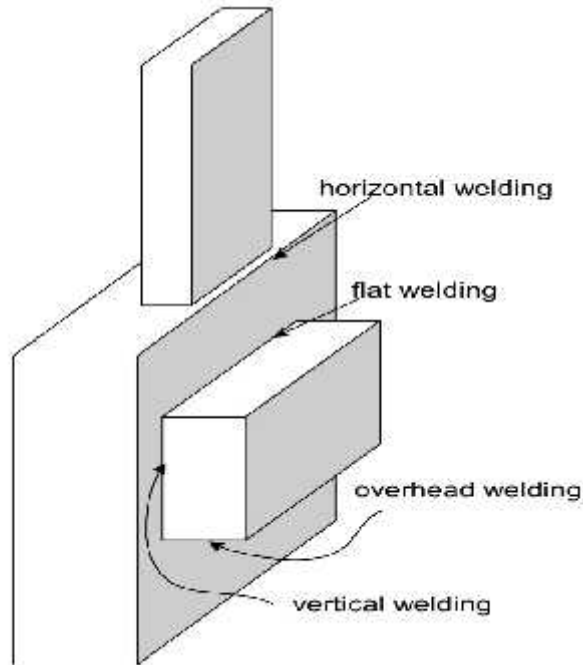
Scheme of placement of components to be welded for different types of welding positions including overhead welding
